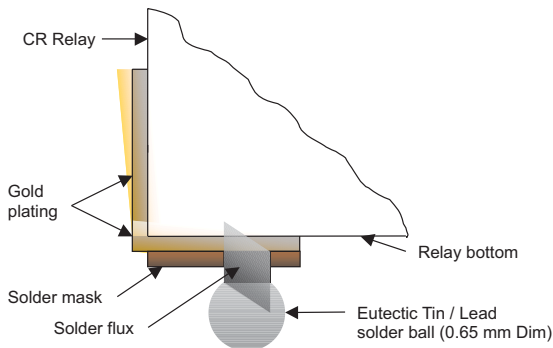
Flux (or eutectic solder paste) is applied to the solder lands on the bottom of the CR relay and solder balls are applied to the solder flux.
